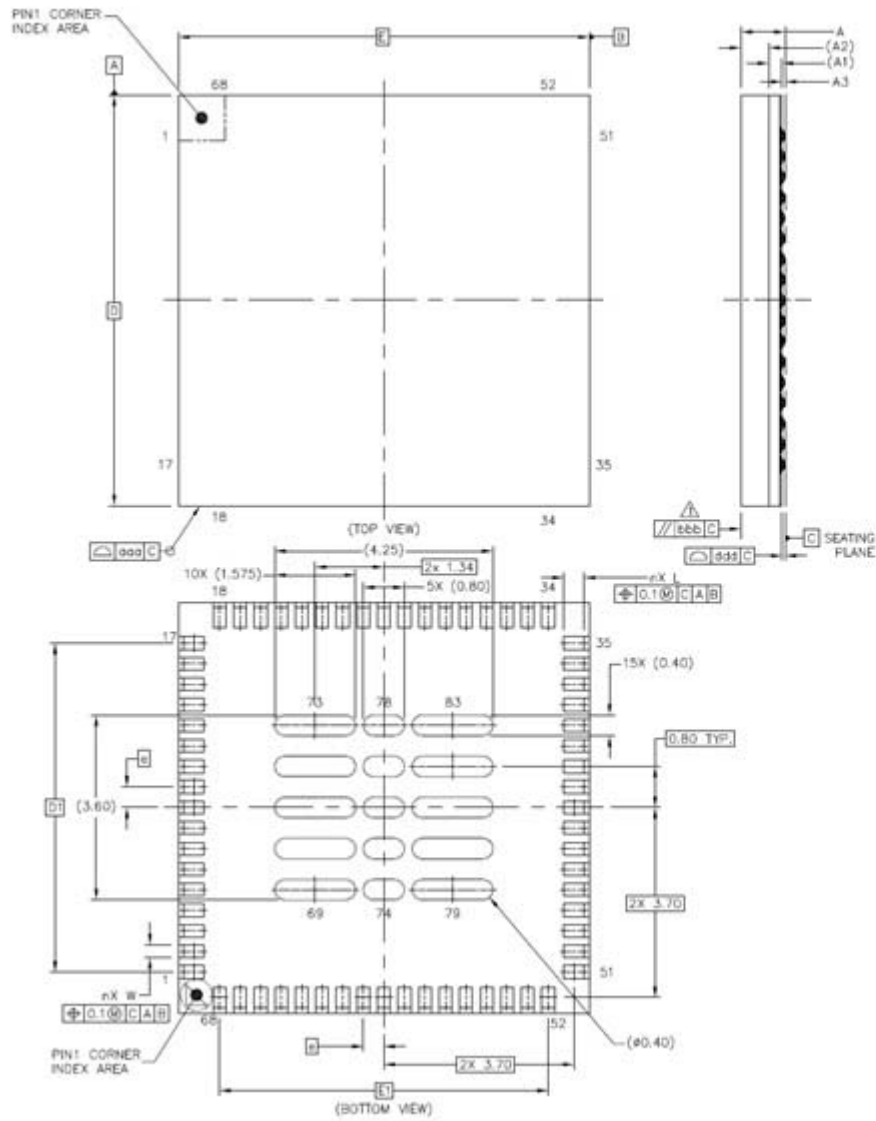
IS2064 - SAC305 PACKAGE DETAILS
